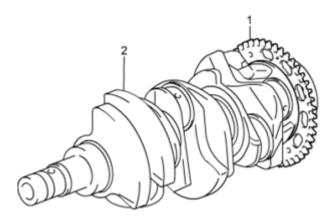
Identifying Sensor Plate And Crankshaft Courtesy of SUZUKI OF AMERICA CORP.
